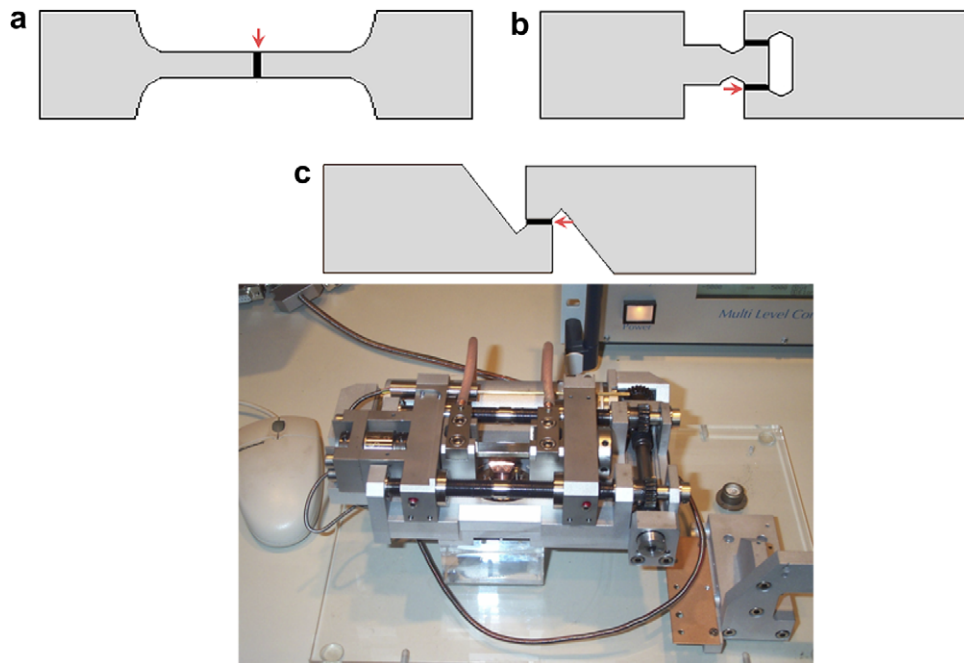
Sn3.8Ag0.5Cu–Ni/Au soldered joints of shape: (a) tensile, (b) double joint shear, (c) single joint shear (left). Double spindle micro-tensile stage (right).
